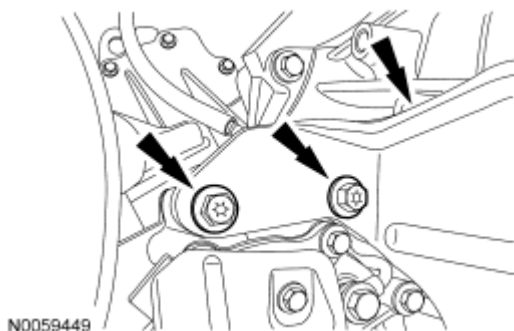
Identifying Bracket-To-PTU Bolts And Bracket
